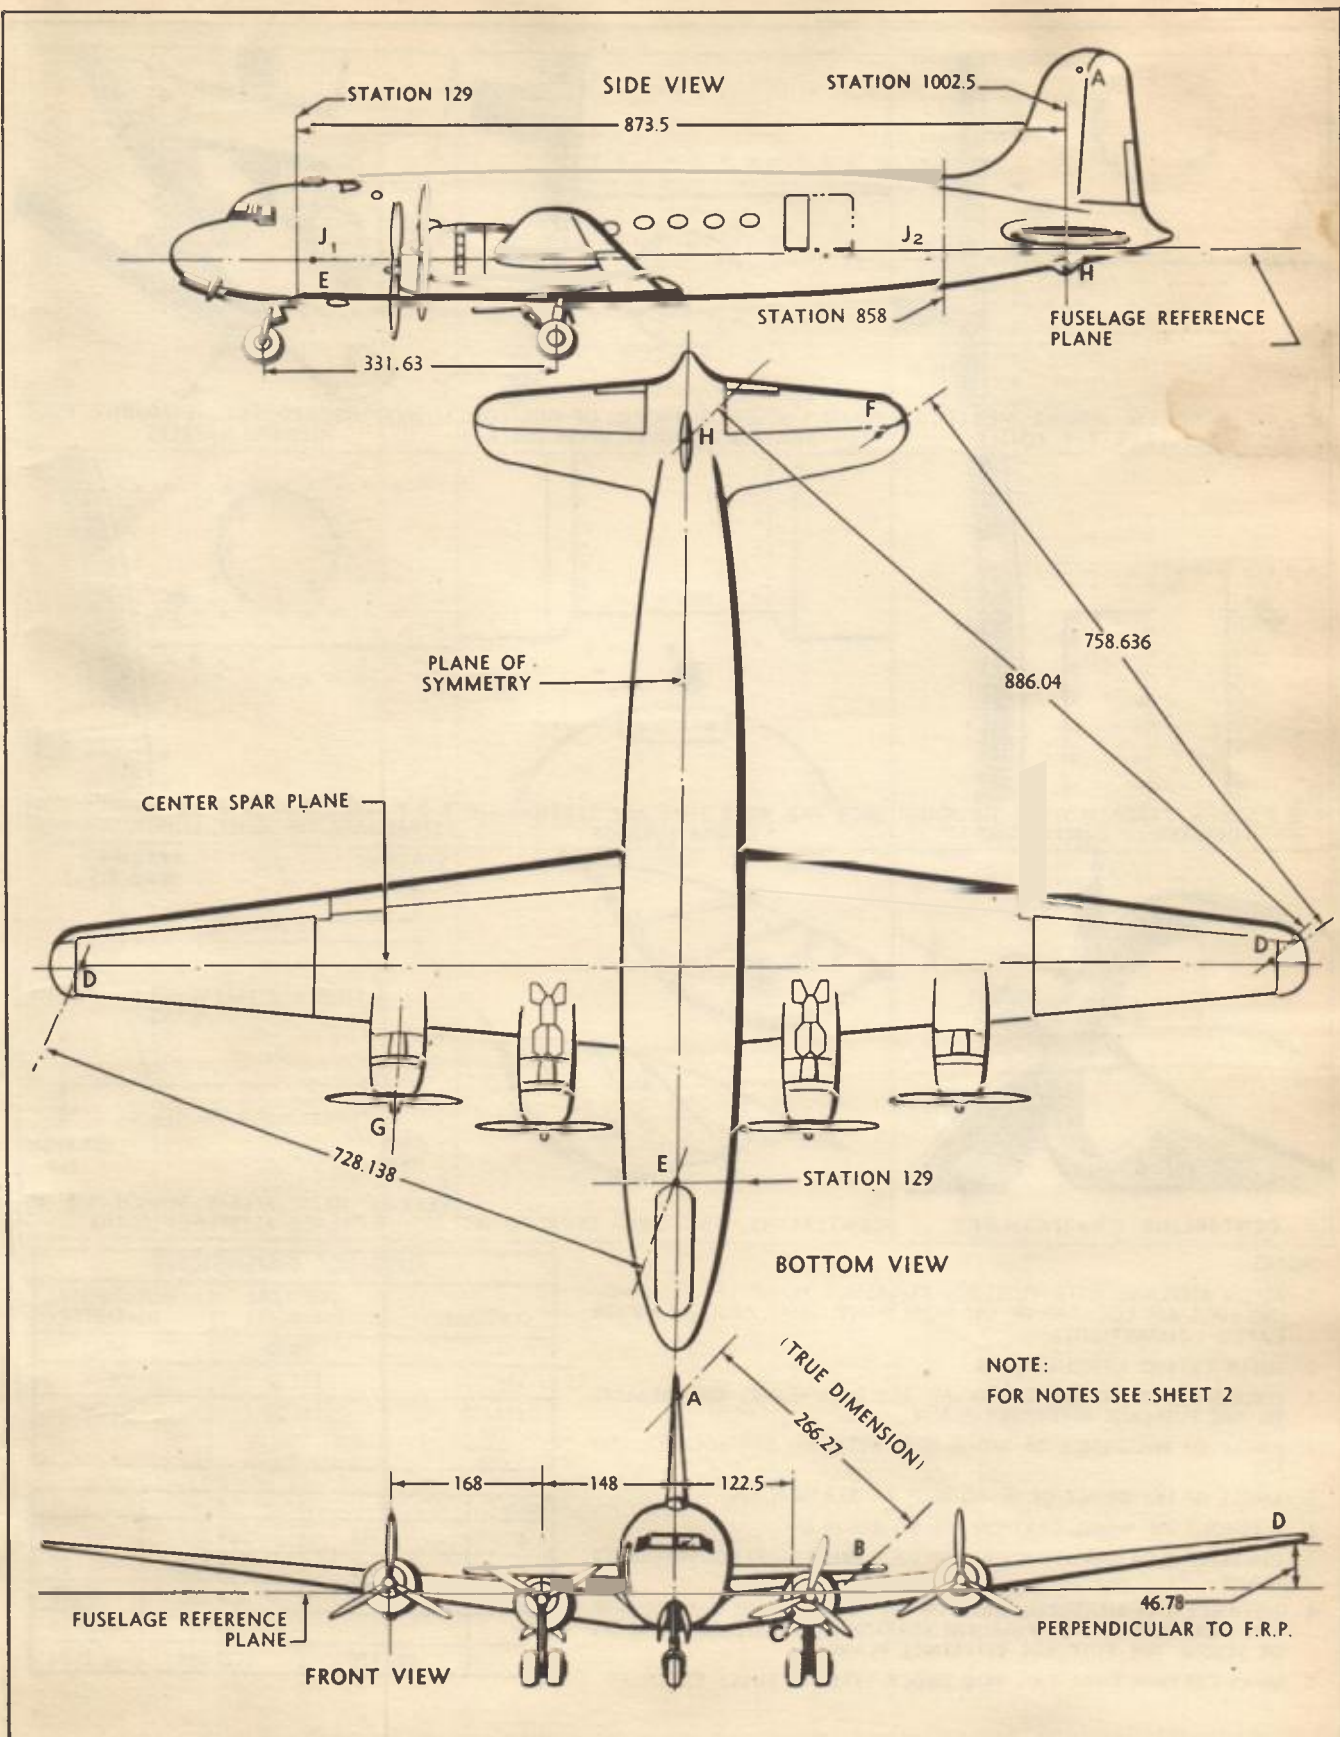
(Sheet 1 of 3 Sheets) — Alignment Diagram
